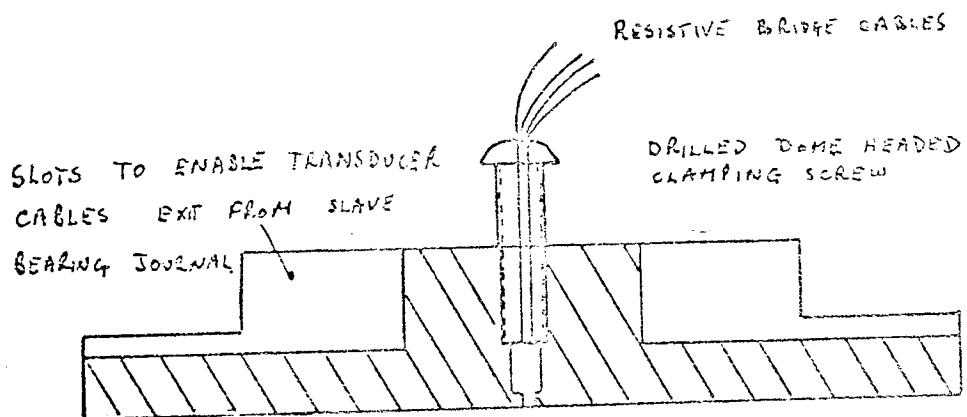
Sectional View of Bearing Top Plate, showing Transducer Adapter hole and clamping screw
